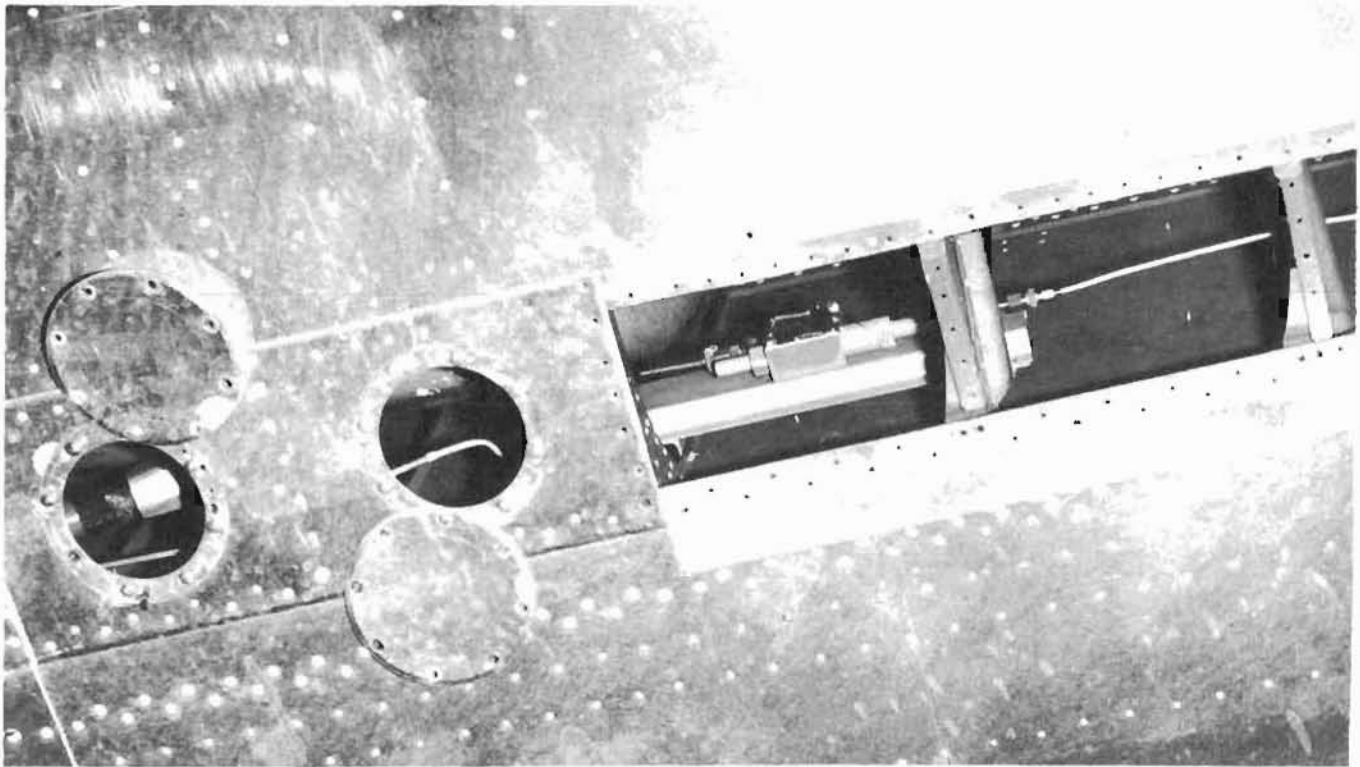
Left Wing Outboard Cable Switch (Switch End)
